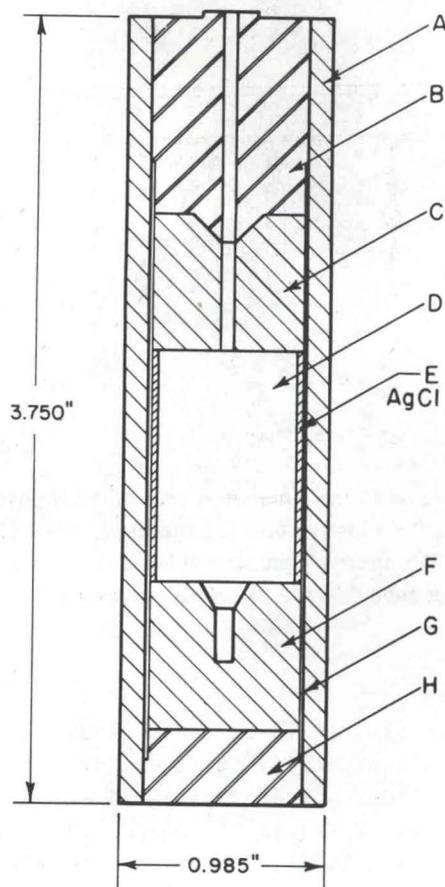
One-inch-diameter furnace assembly: A - pyrophyllite sleeve; B - power lead, thermocouple inlet, stainless steel; C - pyrophyllite filler block; D - nickel capsule; E - silver-chloride capsule sleeve; F - pyrophyllite filler block; G - stainless-steel furnace; H - stainless-steel power lead, all pieces slide fit
